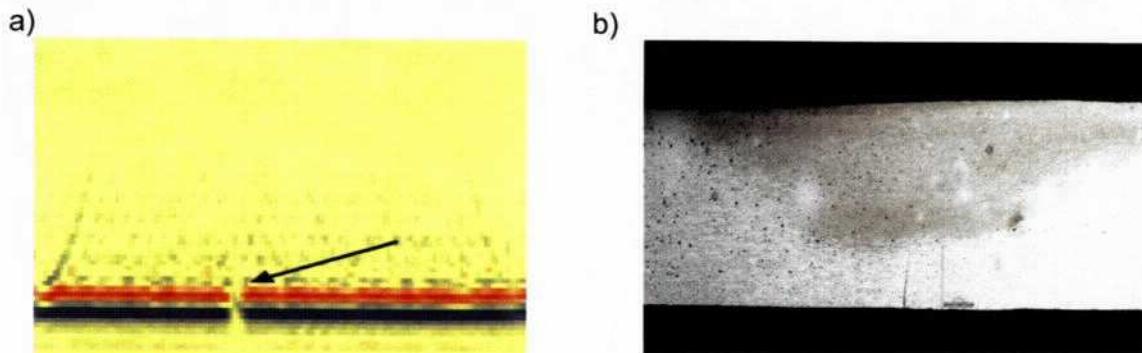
Cross-section of a butt joint showing a lack of penetration in 2-mm thick AA7075-T6 butt weld. a) SAFT image and b) corresponding metallography.
